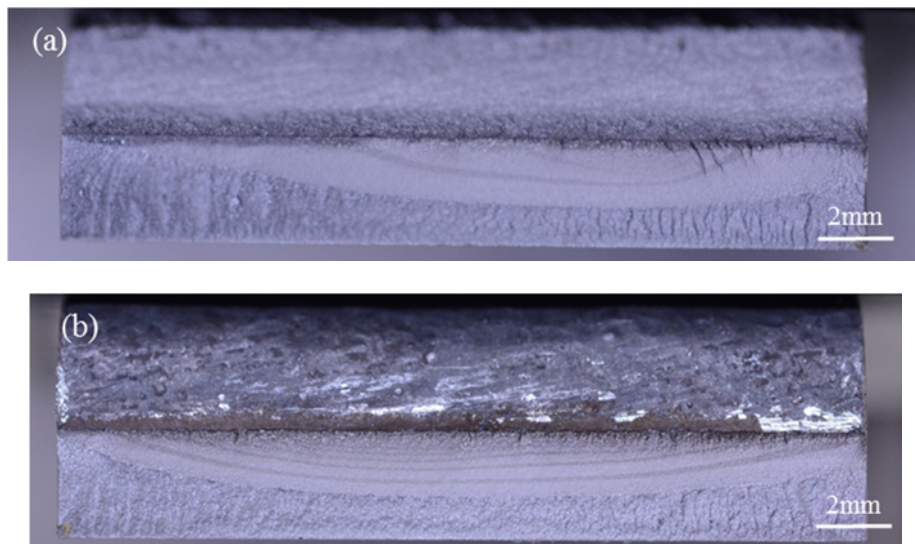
Fatigue fracture surfaces of welded joints after beach mark test. (a) CS-Fe+Al₂O₃ welded joint, (b) as-welded joint.
